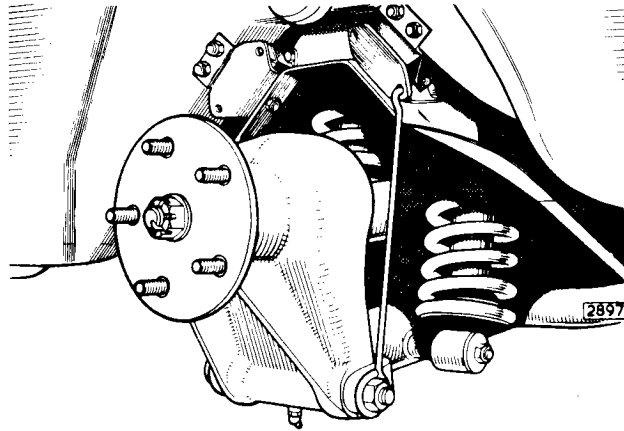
When checking the rear camber angle the rear suspension must be retained in the mid-laden position by means of the setting links (Churchill Tool No. J.25).
